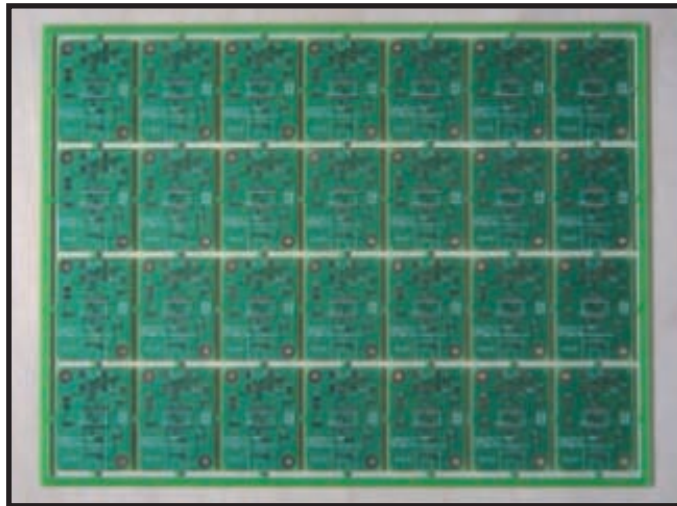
This is a panel containing 28 boards. The panel reduces your manufacturing cost because a robot can place parts and solder on multiple boards simultaneously when they are panelized.
